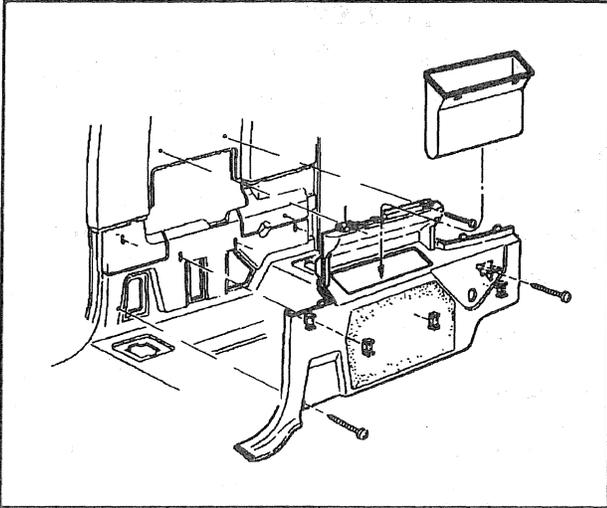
Side Rear Lower Panel (Extended Cab w/Rear Seat)
